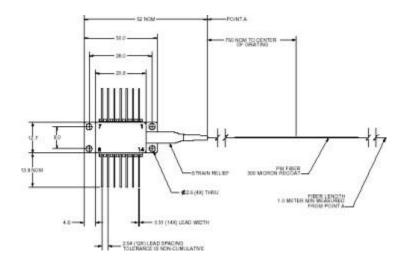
Example Mechanical and Electrical Schematic for a Laser Module
